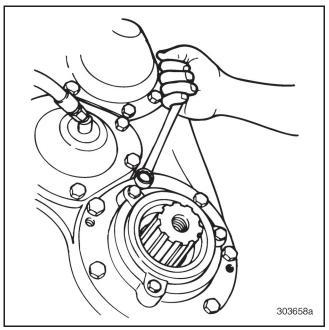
Removing Rear-Drive Shaft Assembly Capscrews
